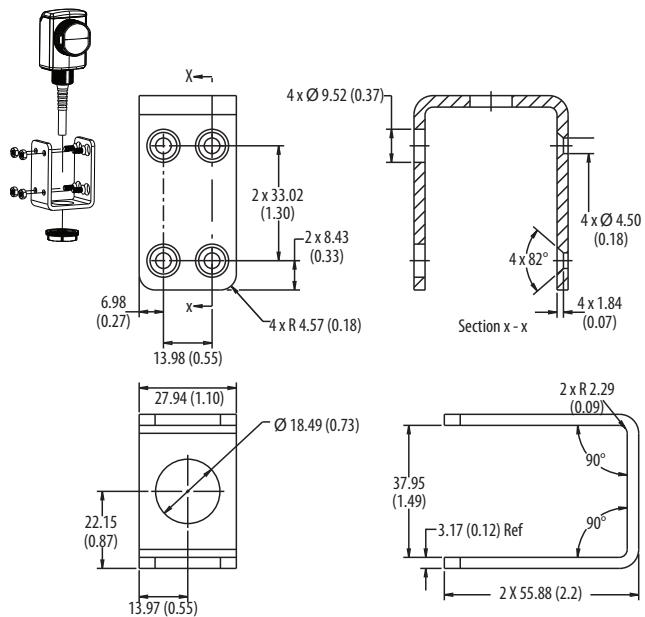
Cat. No. 60-BAF-SM 30 mm (1.2 in.) Bracket Side [mm (in.)]
